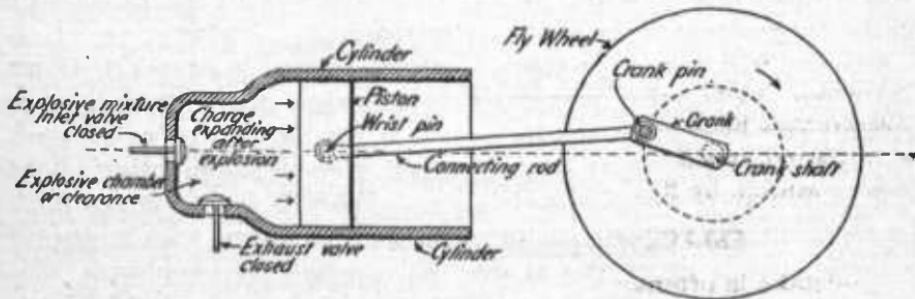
Diagram showing mechanism of internal combustion engine—expansion stroke.
